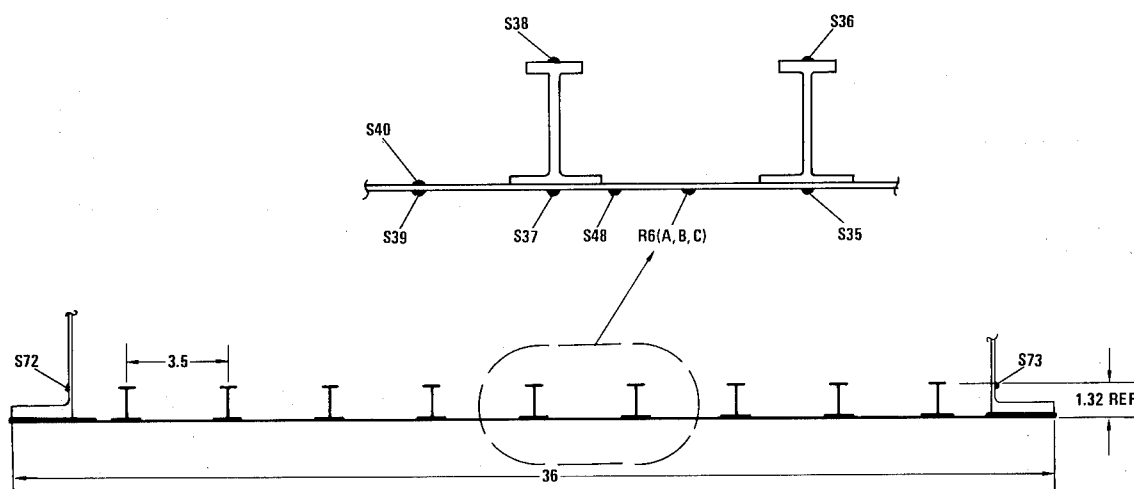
Section B-B – stiffened panel cross section with strain gage locations.
